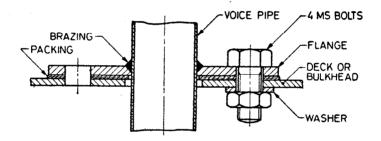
Voice Pipe — Passage Through Deck and Bulkhead
